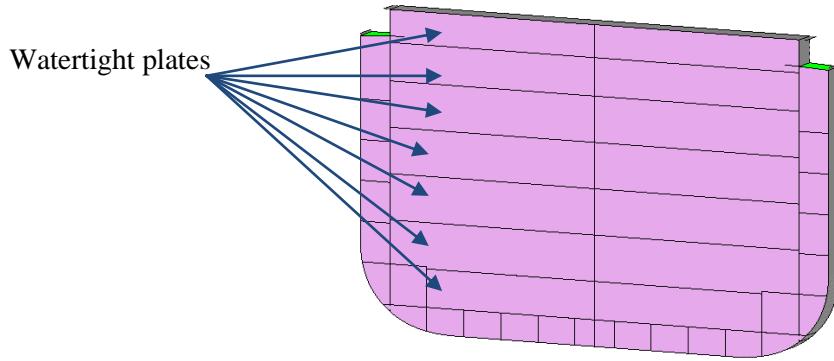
Watertight bulkhead structure: watertight side of the watertight bulkhead.
